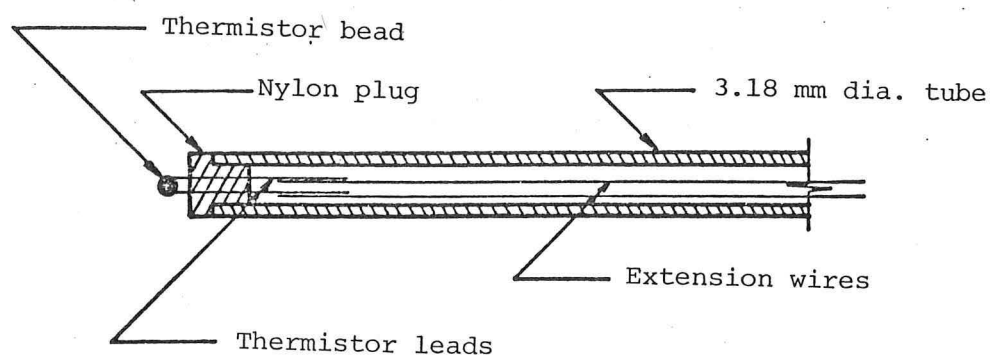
Enlarged sectional view of a thermistor probe.
